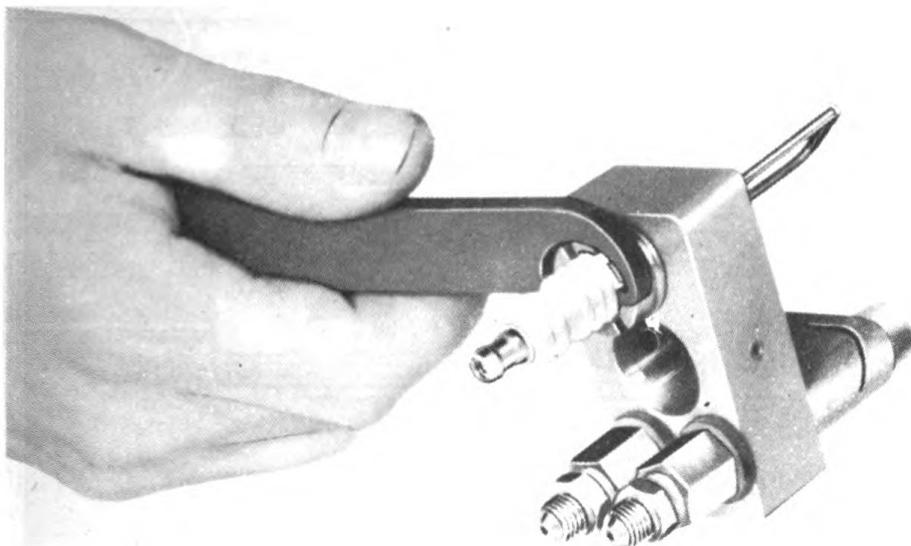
Unscrewing spark plug nut using spanner wrench.
